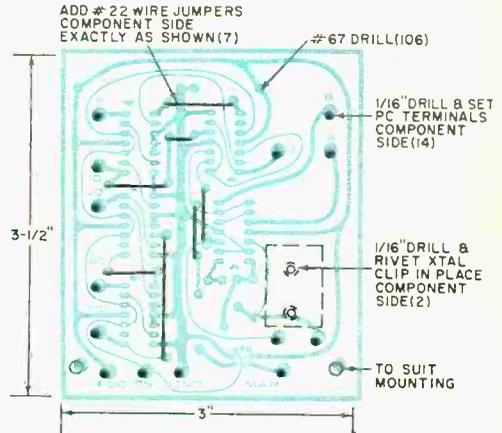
Drilling guide for the timing module PC board. Mount parts called out on component side.
